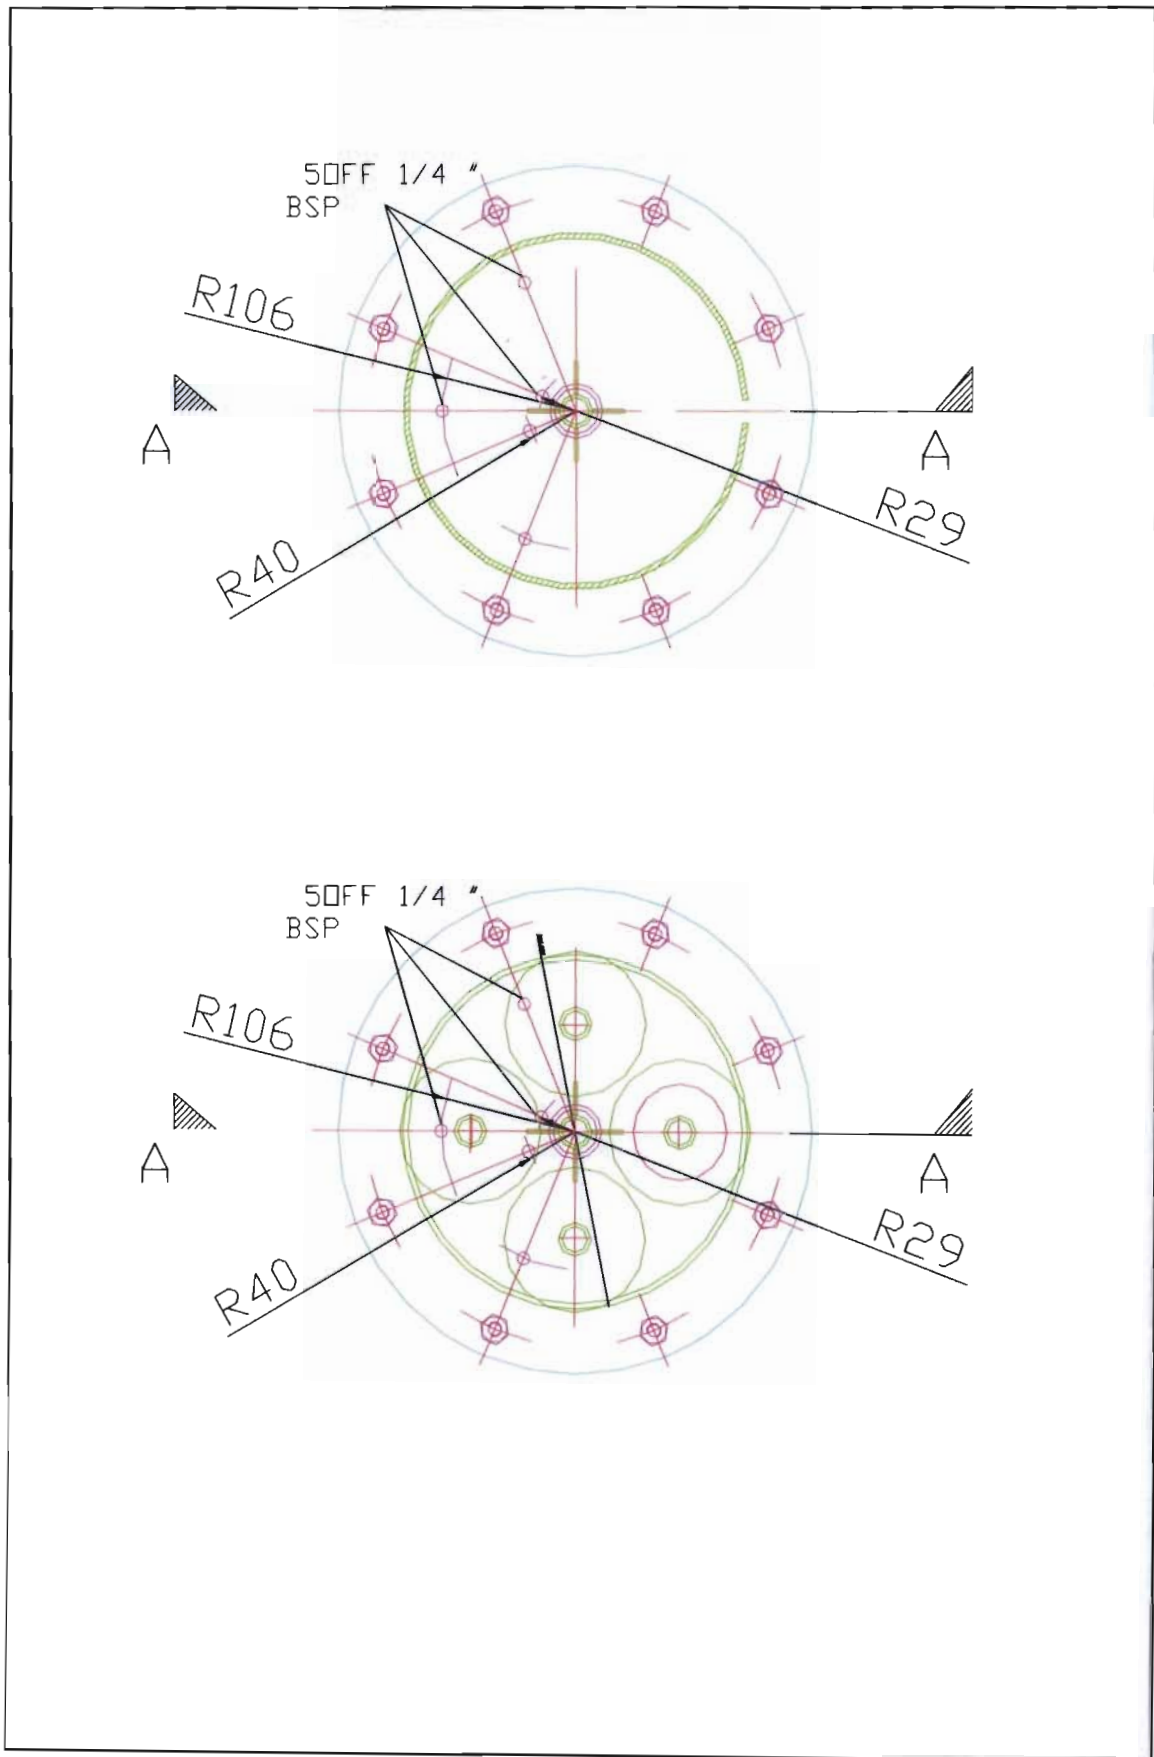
Drawing Design of the Bottom and Top Flanges of the Electric Heat Storage Tank
